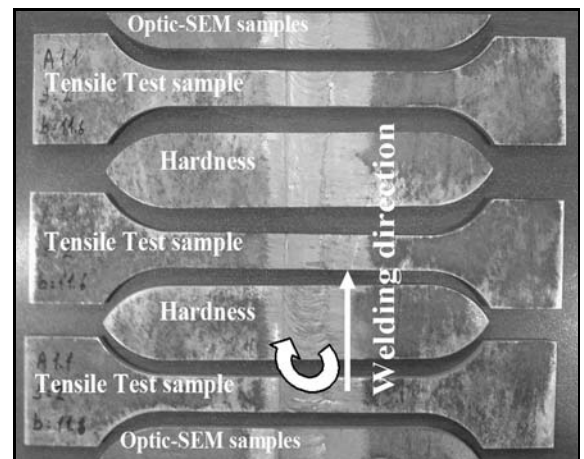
Extraction of experimental samples from welded samples cut by wire erosion.
